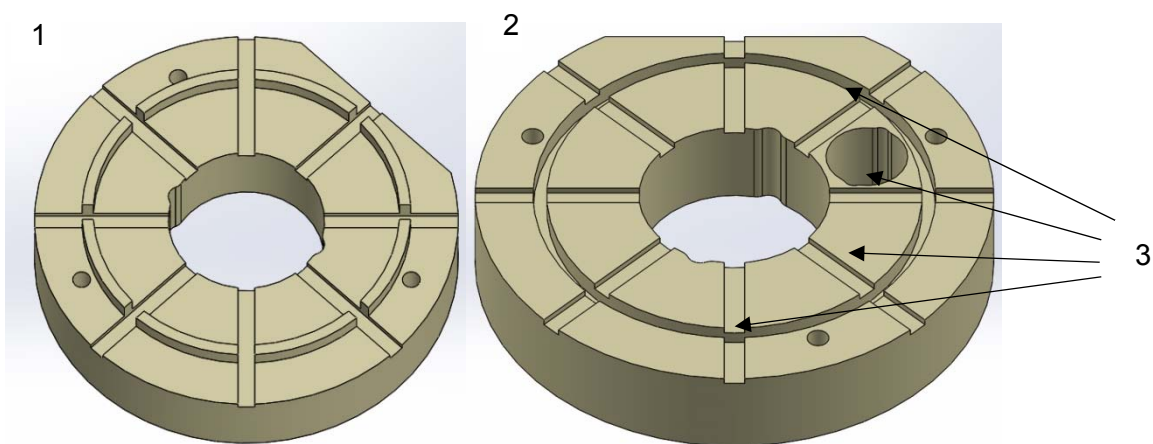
Inner cell body parts. 1 – upper part. 2 – lower part. 3 – 8 channels for supercritical fluid access to the electrodes and separator
